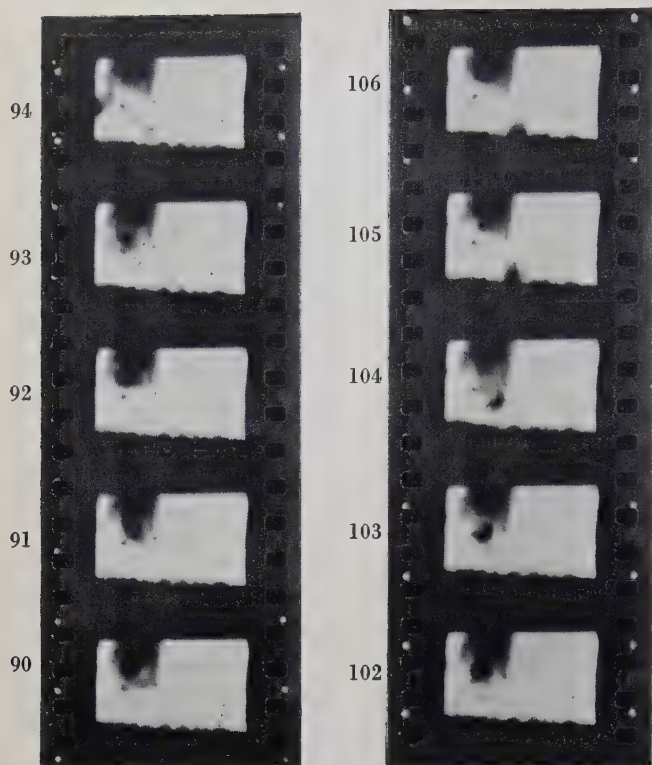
Gas bubble in the coating (picture 90); 0,02 second later the gas bubble has burst (picture 91). In pictures 92 and 93, the material of the coating appears to "neck" the coating drop.
